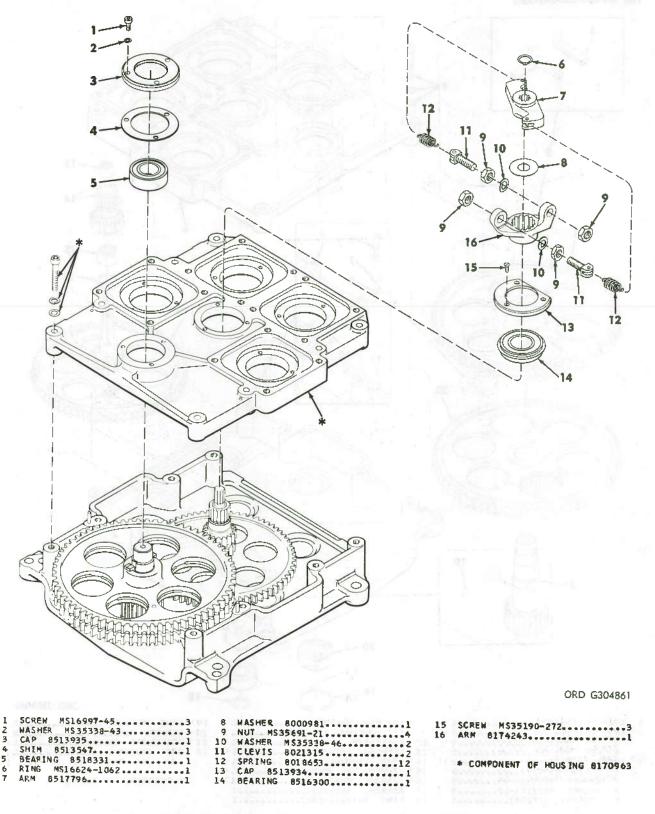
DRIVE /8170973/-PARTIAL EXPLODED VIEW
